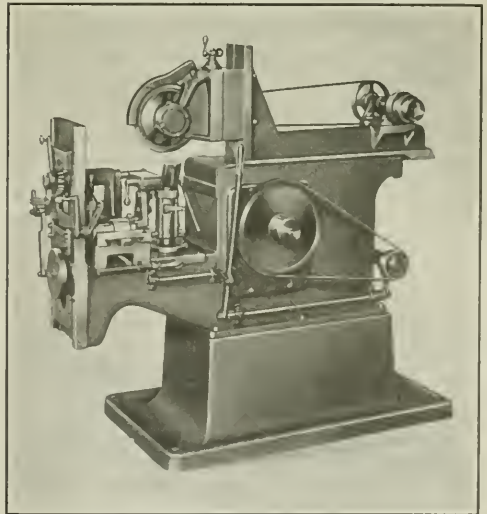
View of Right-hand Side of Garrison Gear Grinding Machine
